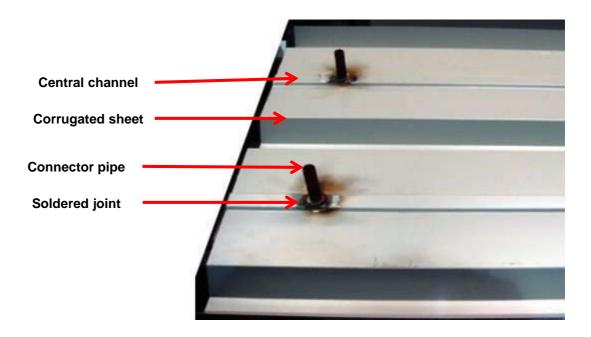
Connector pipes soldered to inlet and outlet points underside the corrugated sheet.
